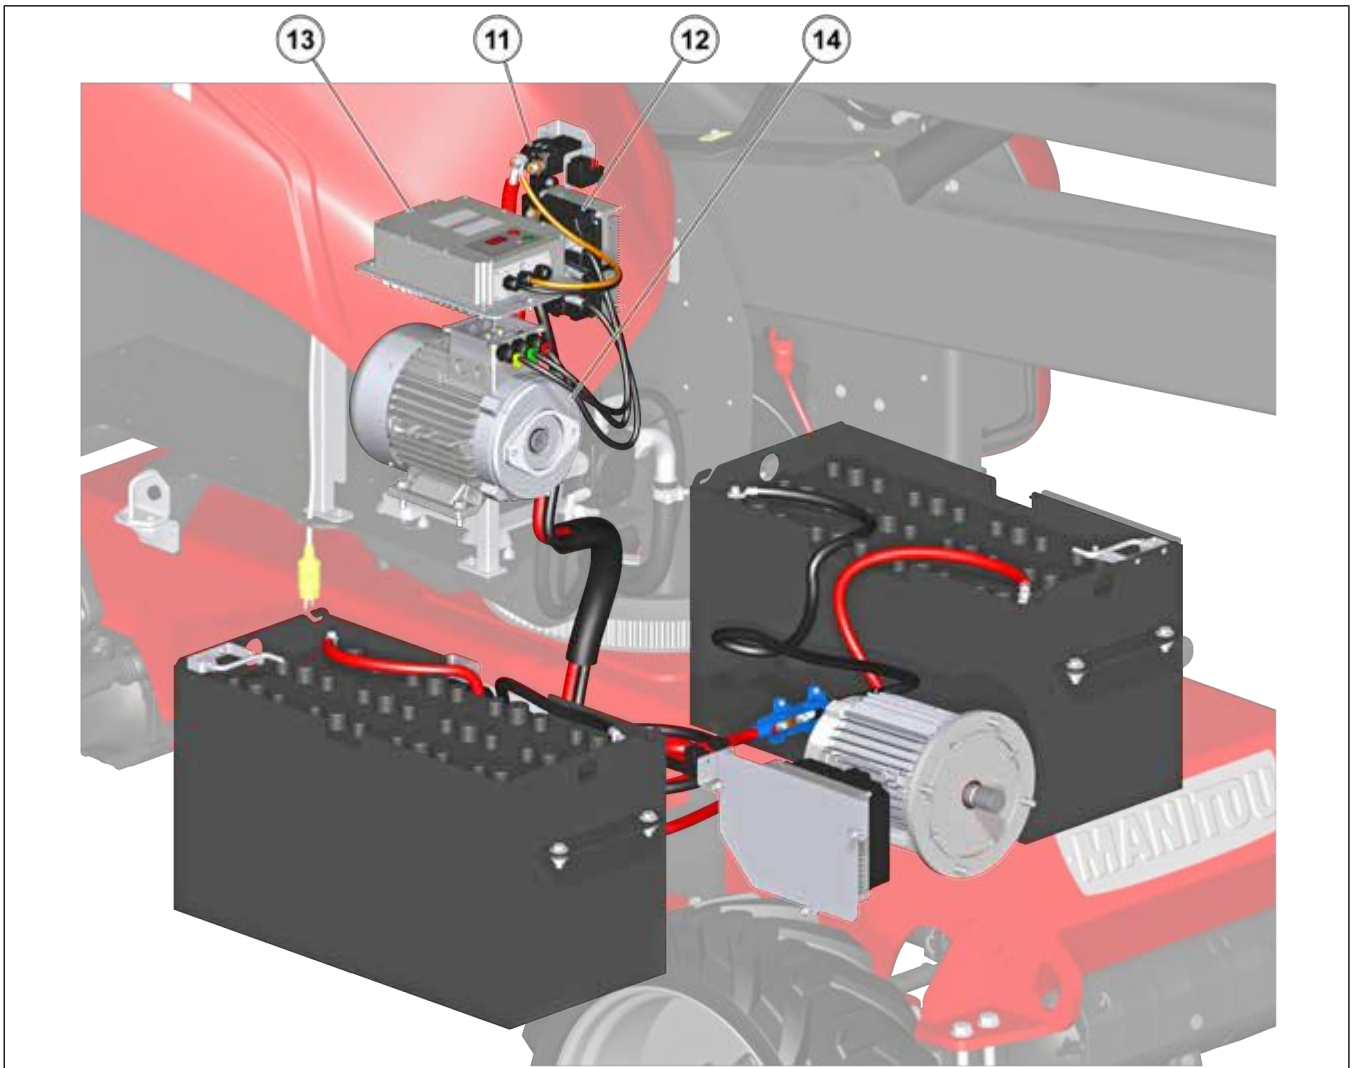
Checking cables and high-voltage electrical connections 3 - from machine no. MAN00000J01101634
